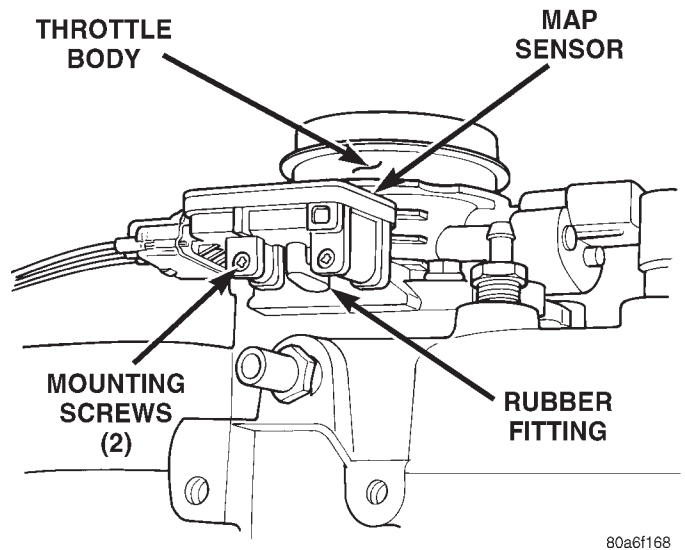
Rubber L-Shaped Fitting—MAP Sensor-to-Throttle Body
